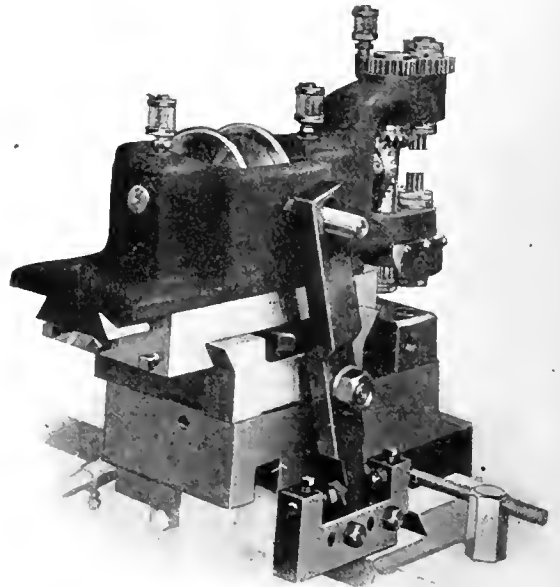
Rear View of Milling Attachment, showing Feed Arrangement
